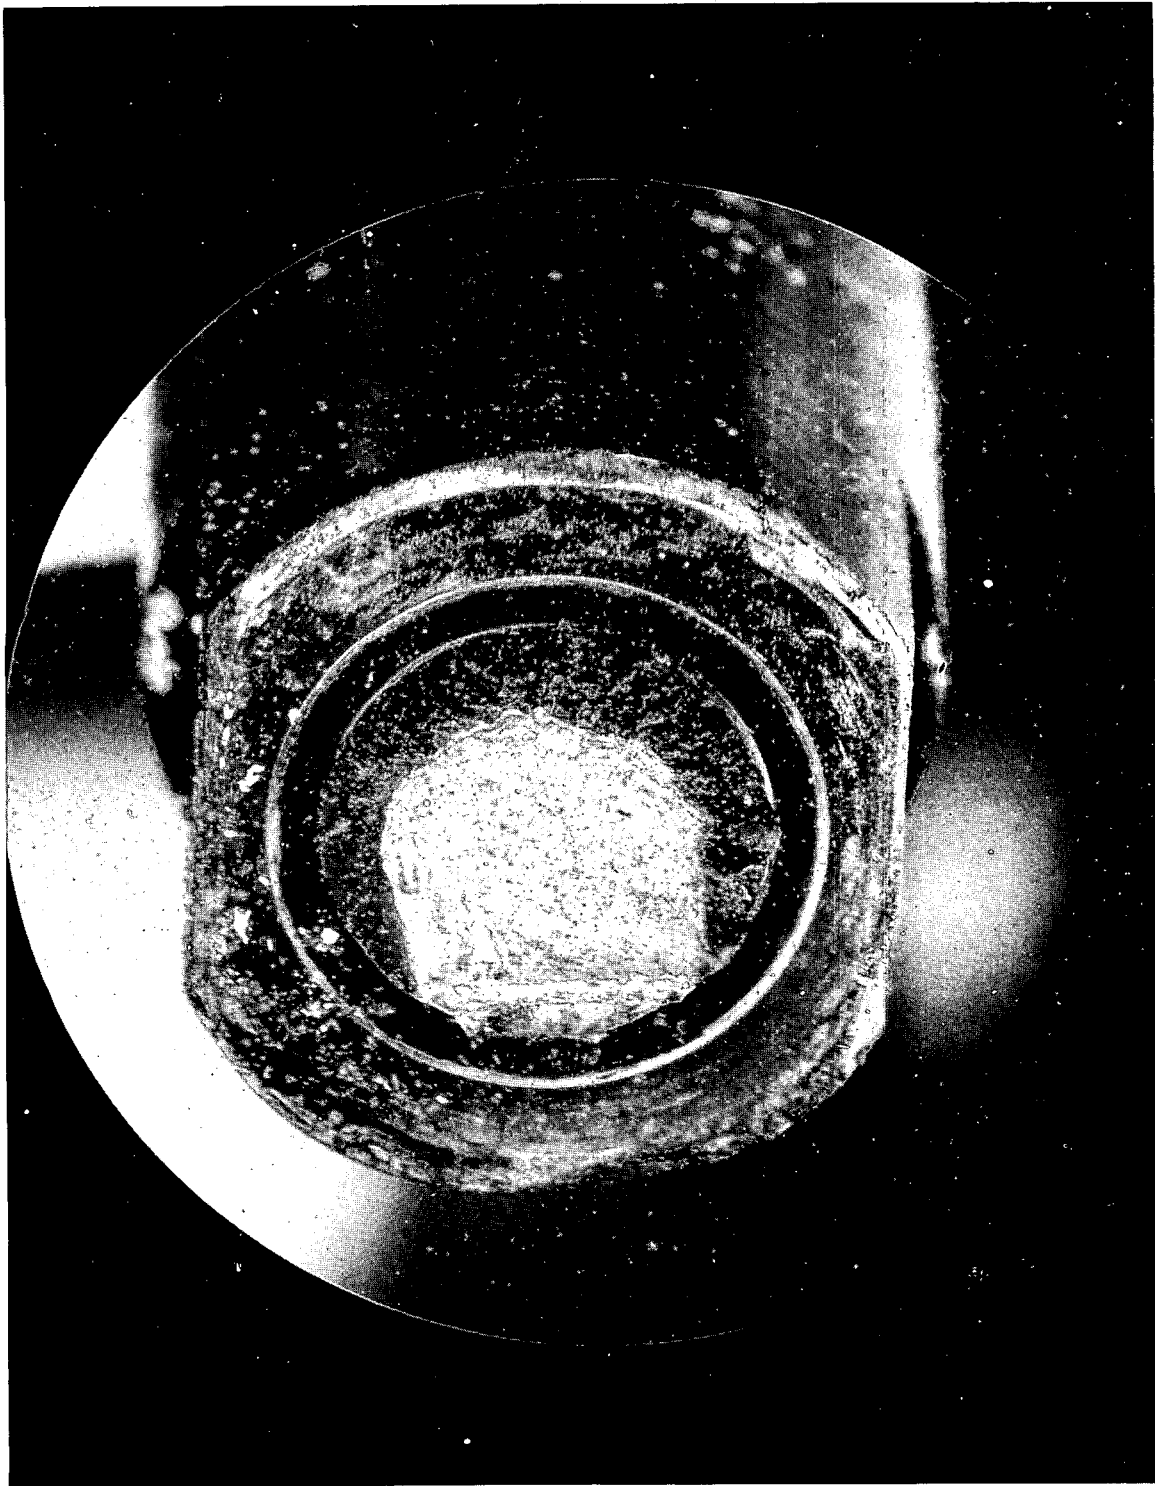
Recovered SL-1 Control Rod Extension Showing Fracture. Dark Outer Area of Fracture Caused by Pre-Accident Fatigue. Bright Area Caused by Impact Tensile.
